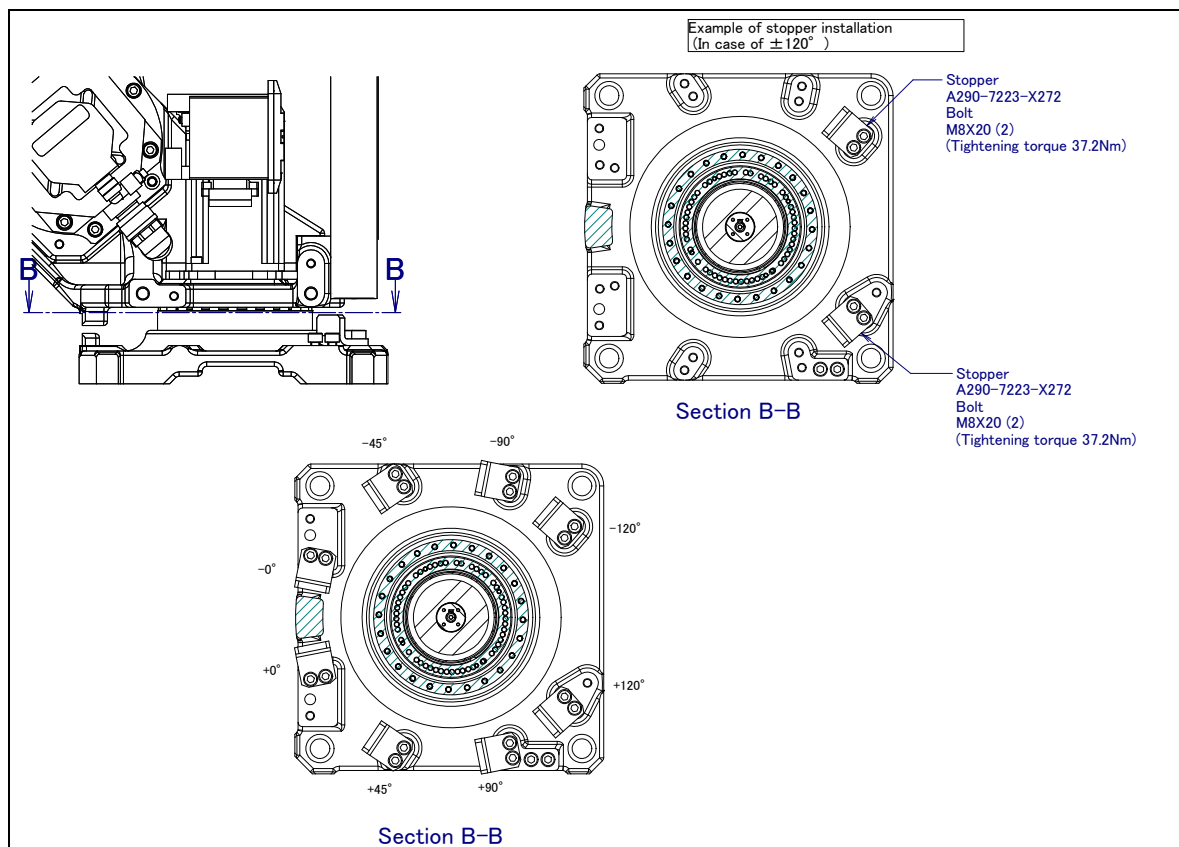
(a) Attachment of J1-axis mechanical adjustable stopper
